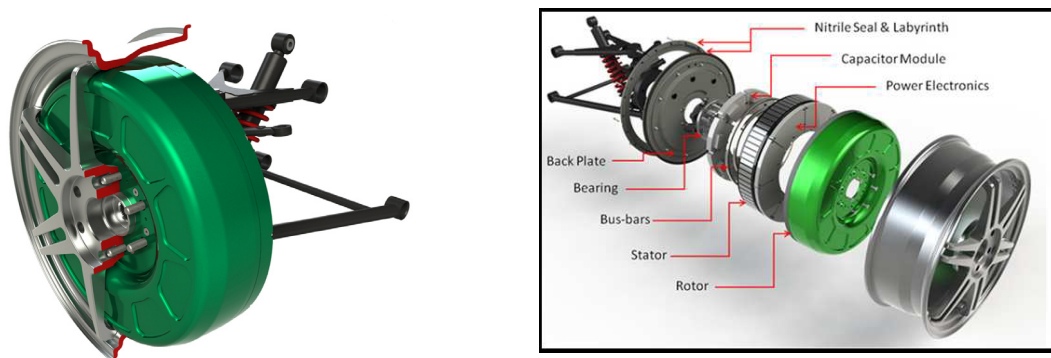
External rotor surface-mounted PM machine with concentrated windings in a flywheel of electric Protean Ford truck, Protean Electric® [Pro 2012].
